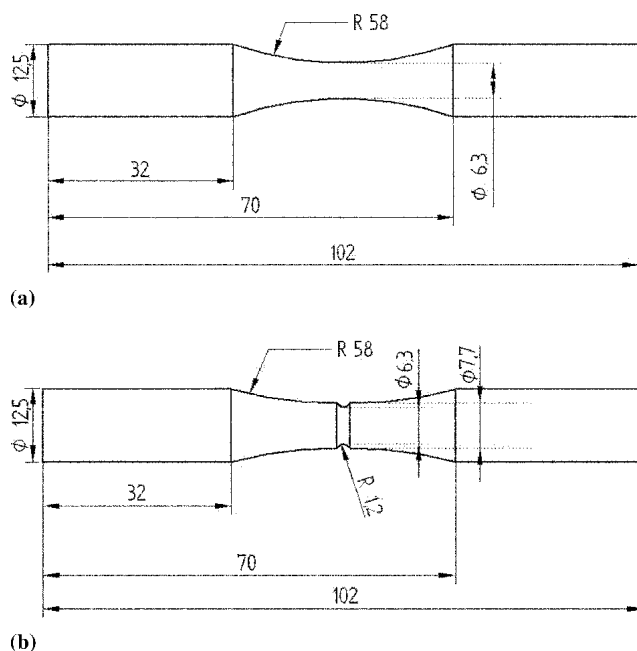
Testpiece geometries and dimensions: (a) smooth testpiece, (b) notched testpiece; all dimensions are in millimeters.
